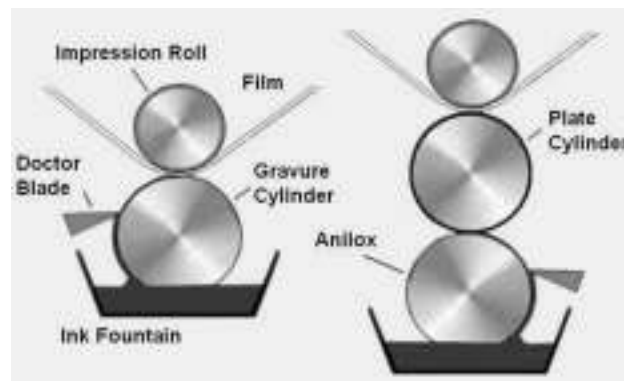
A schematic view of the rotogravure and flexo printing
